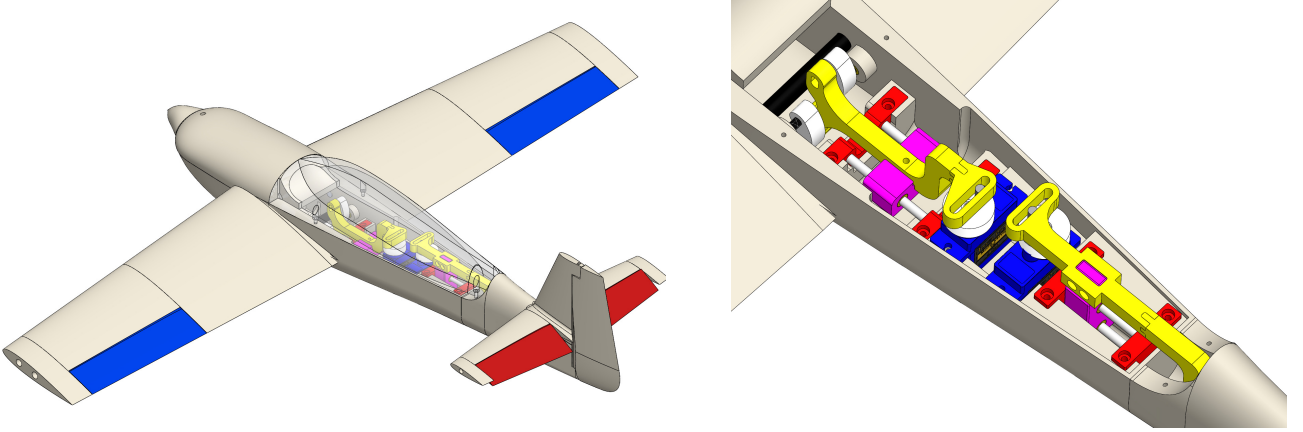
Isometric view of the aircraft and detail of the internal mechanism.
